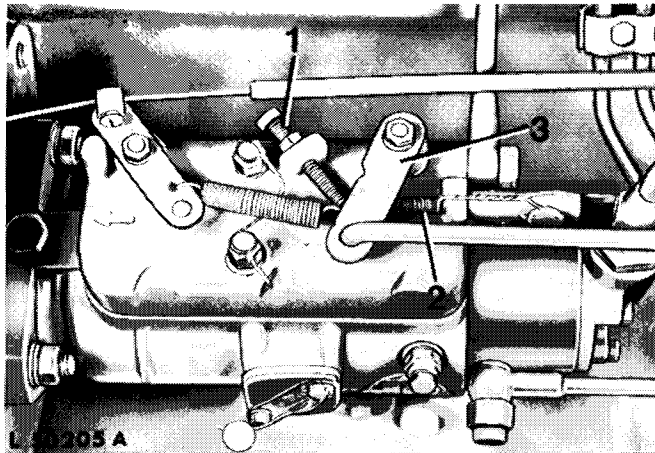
ROTO DIESEL Injection Pump, Installed
